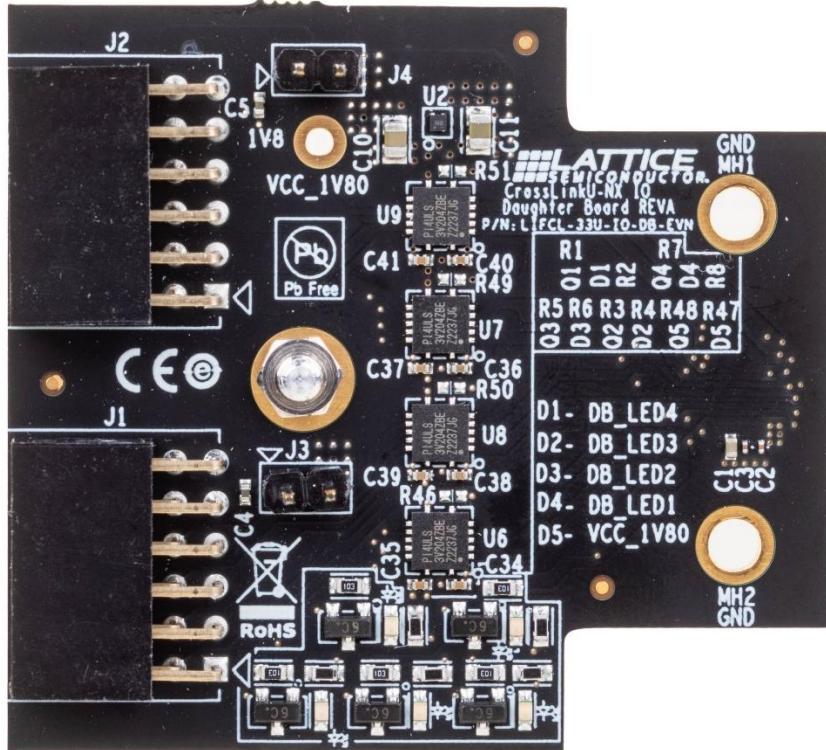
Top View of CrossLinkU-NX I/O Daughter Board
